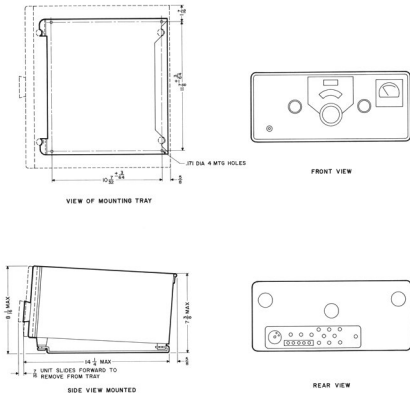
51S-1/1A Receiver, Outline and Mounting Dimensions with 551E-4 Mount
